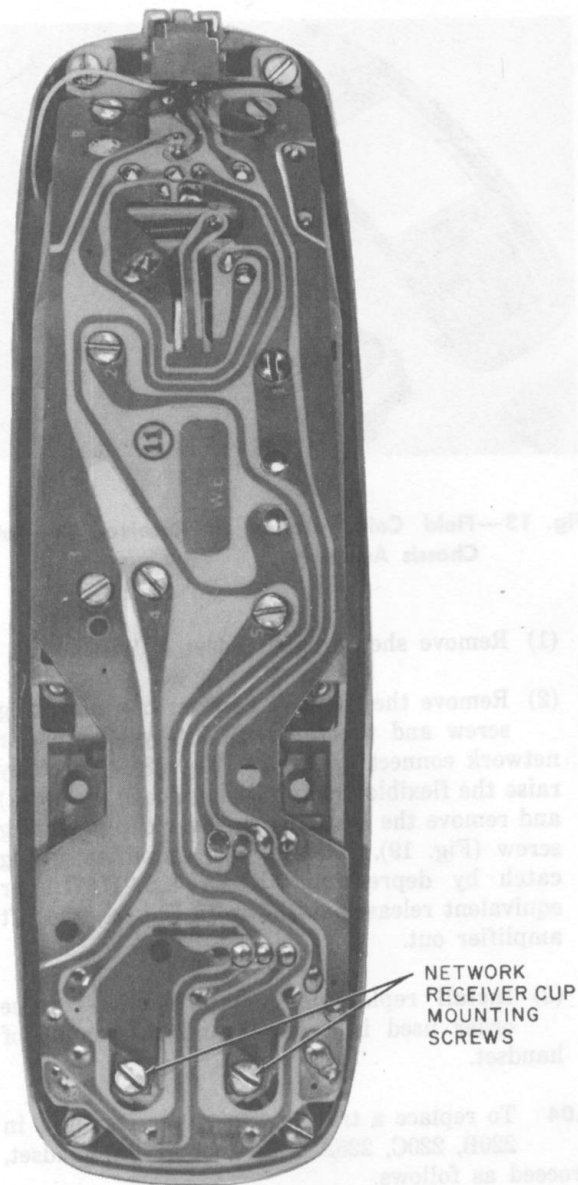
2220C Hand Telephone Set Showing Location of Network Mounting Screws
